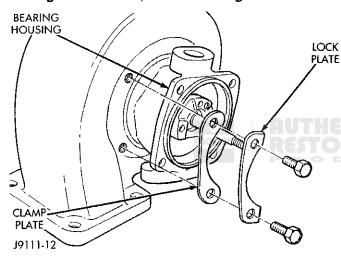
Turbine Housing Lock Plates and Clamp Plates
